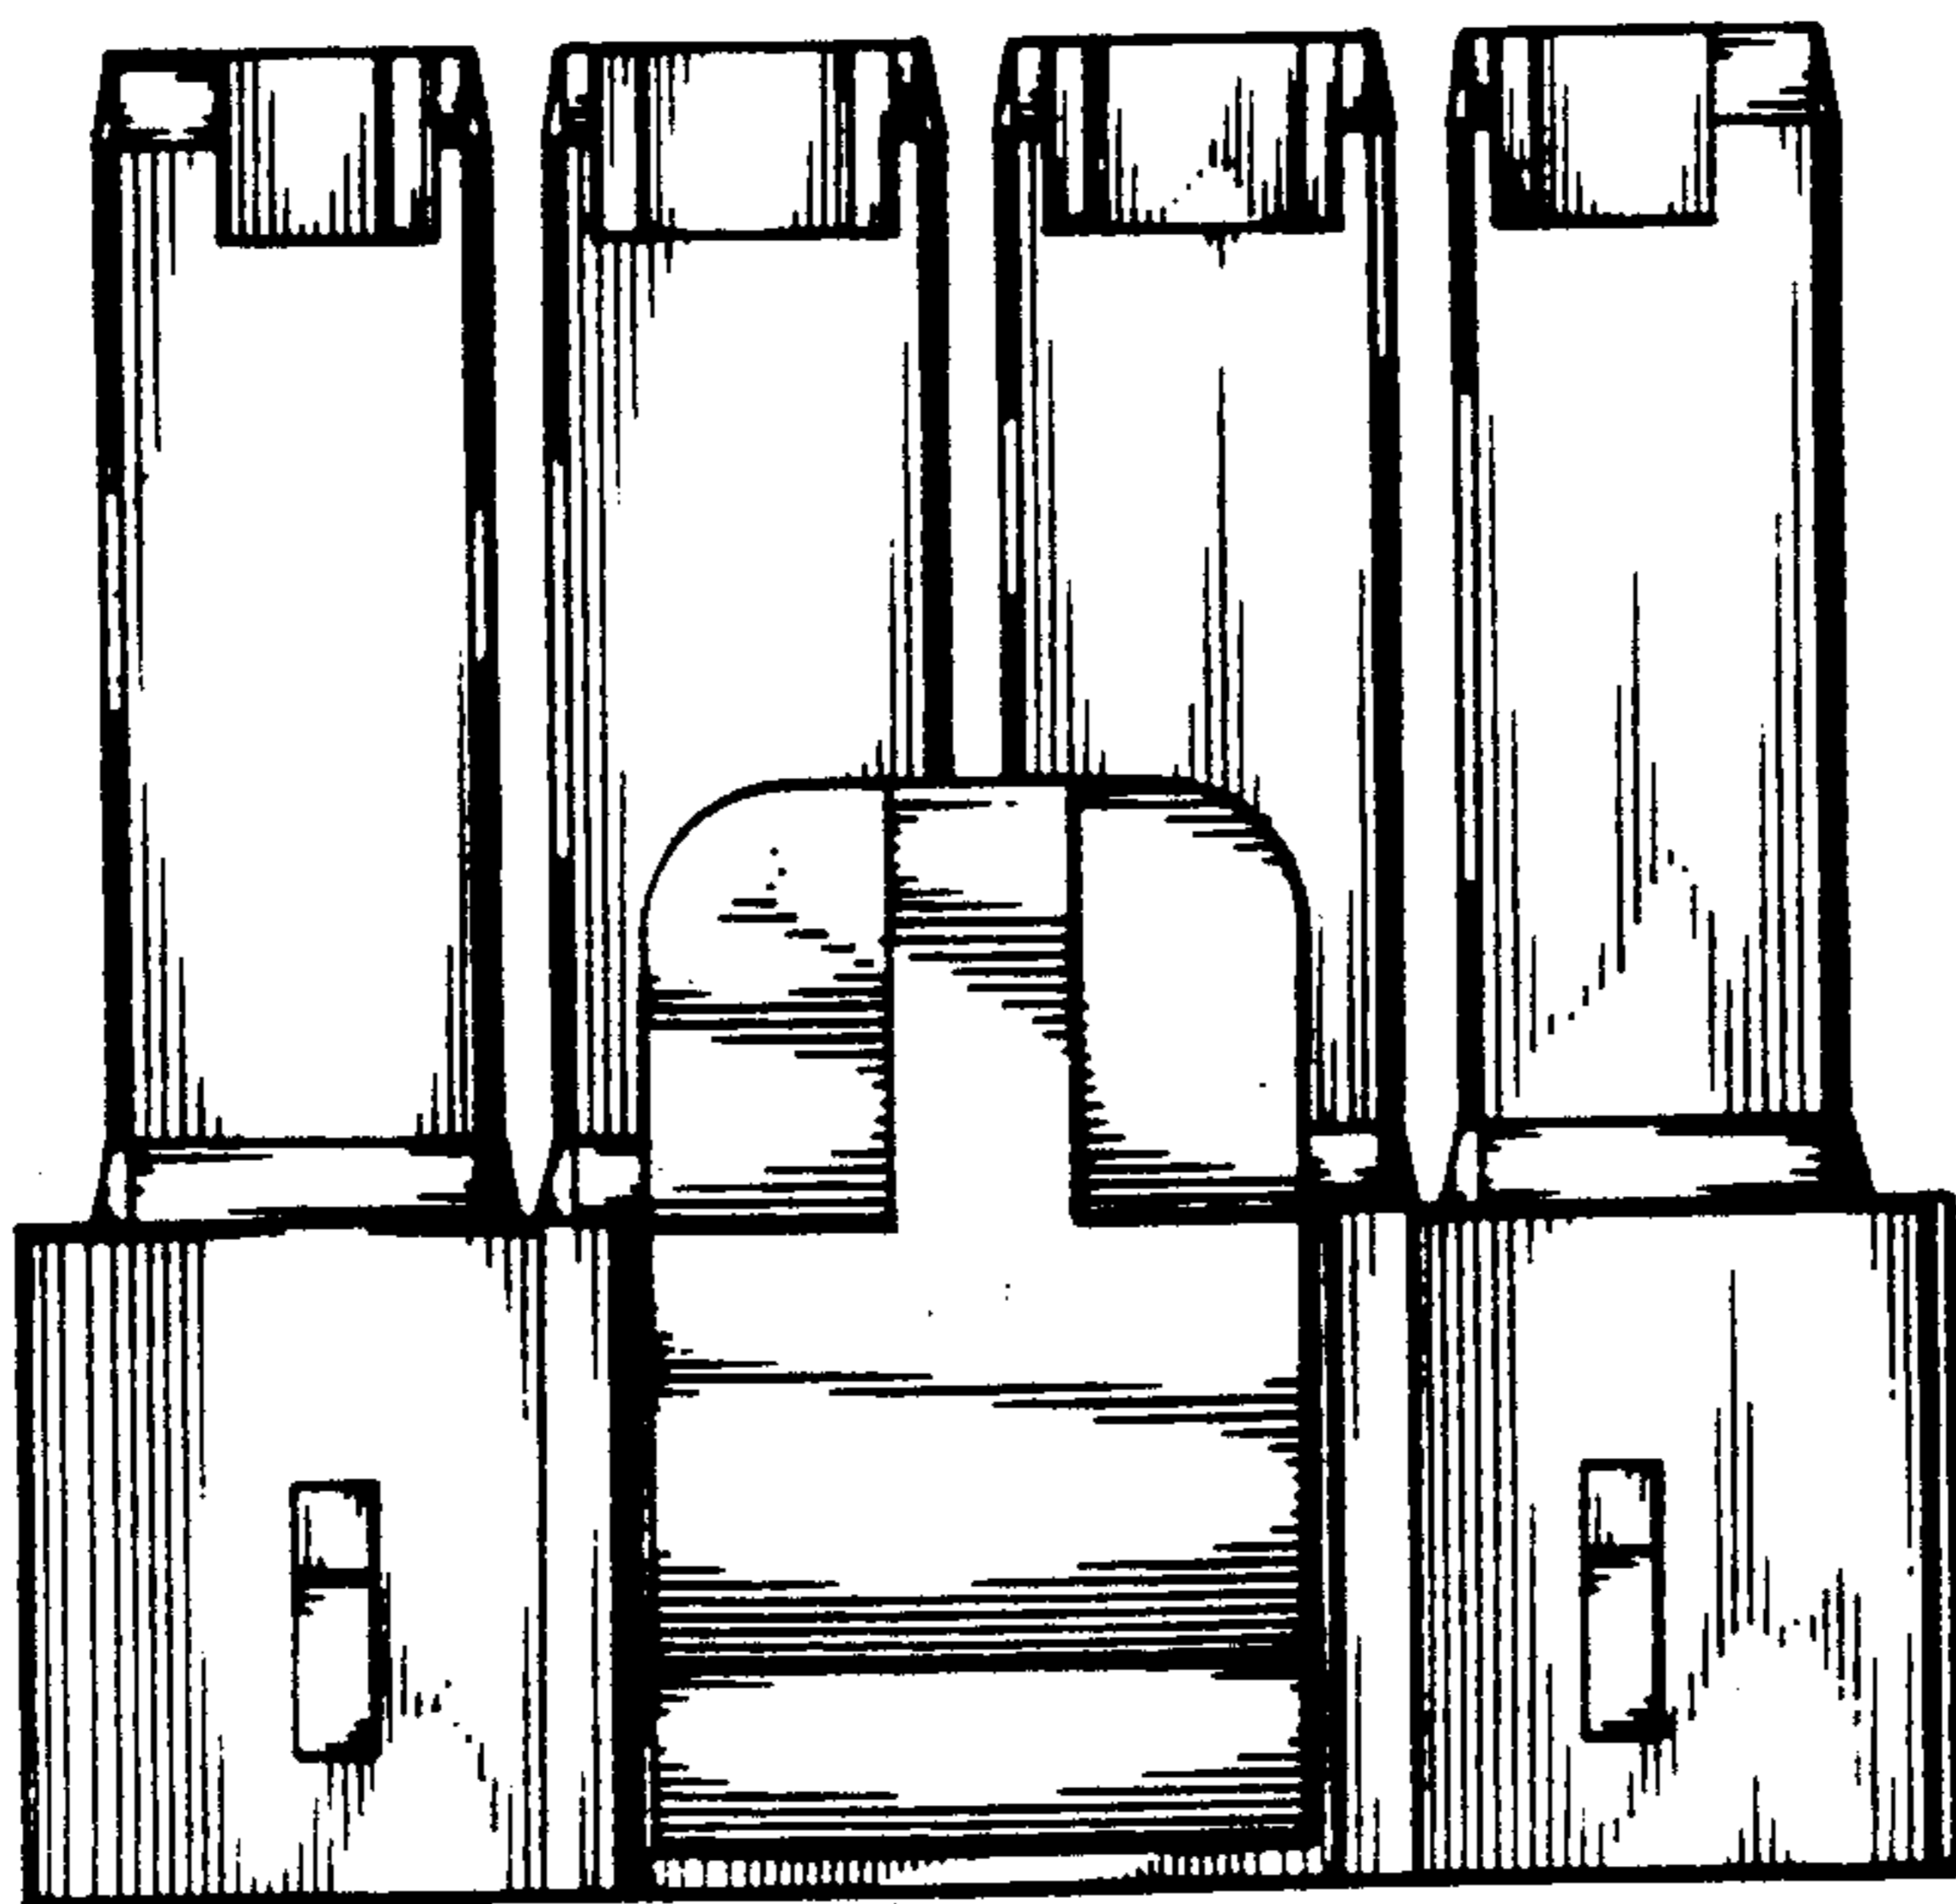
is a perspective view of a housing for an electrical connector showing our new design;
